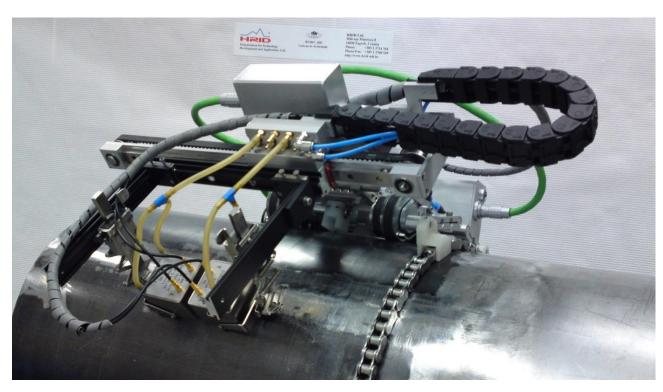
SPH photographs on stand in laboratory with simple probe holder
